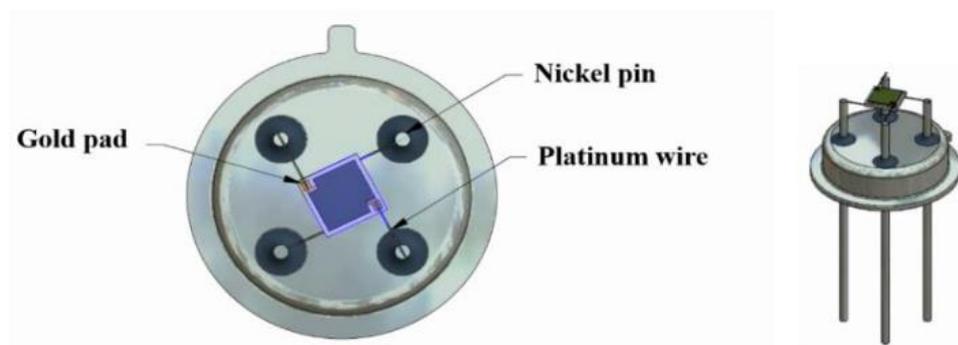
TiO_2 gas sensor substrate welded onto a TO-39 housing using platinum wires
